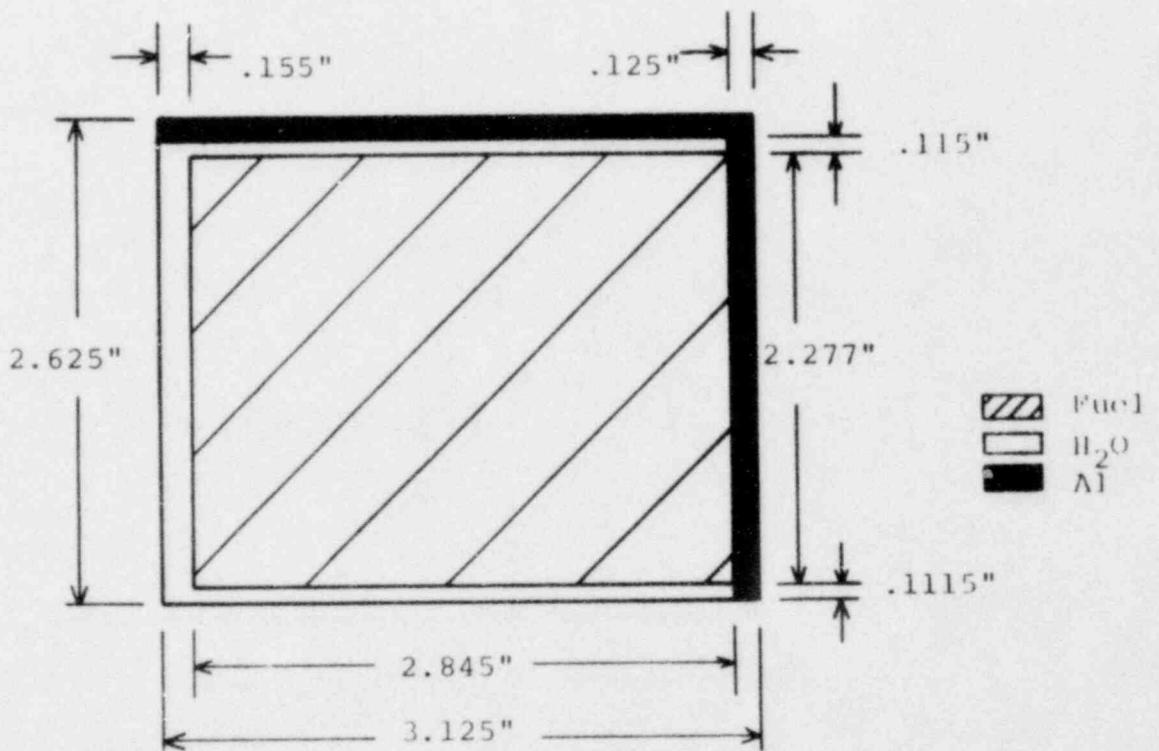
B. UFTR Quarter Fuel Box Unit Assembly.
